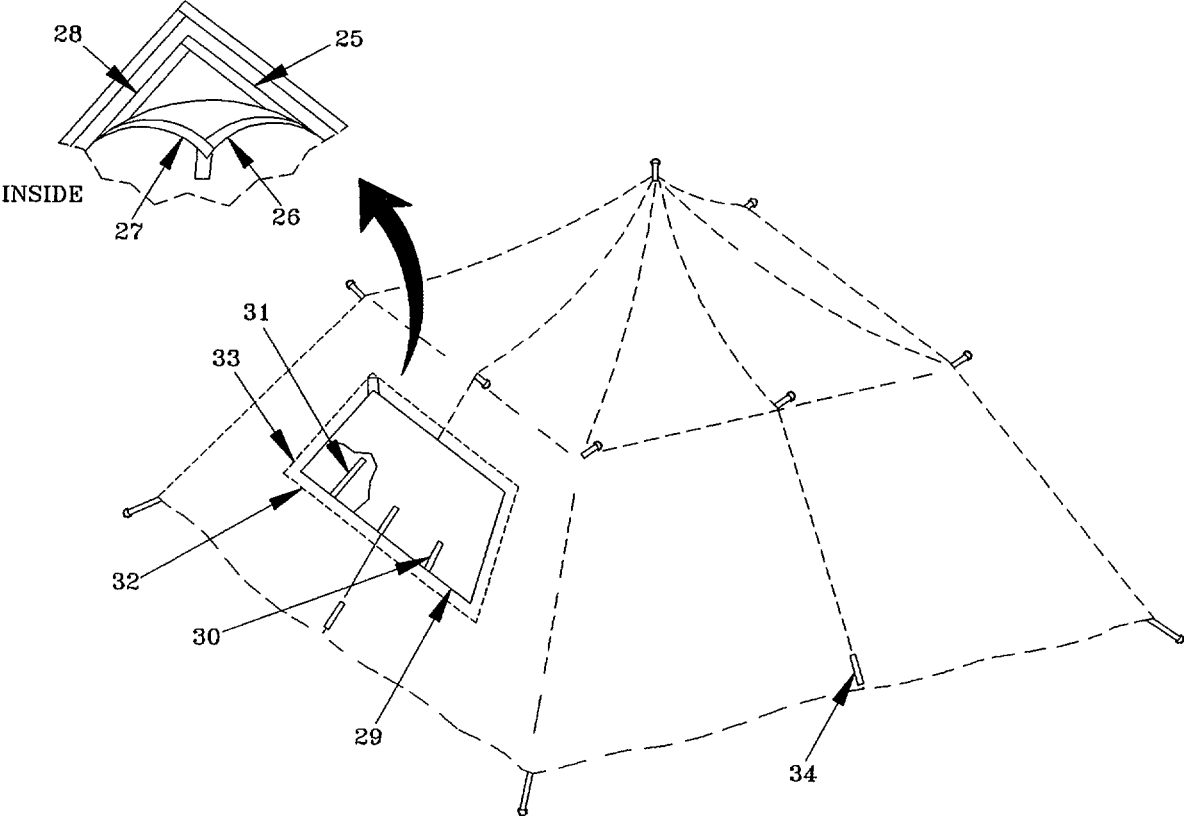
LINER ASSEMBLY (Sheet 2 of 2)
